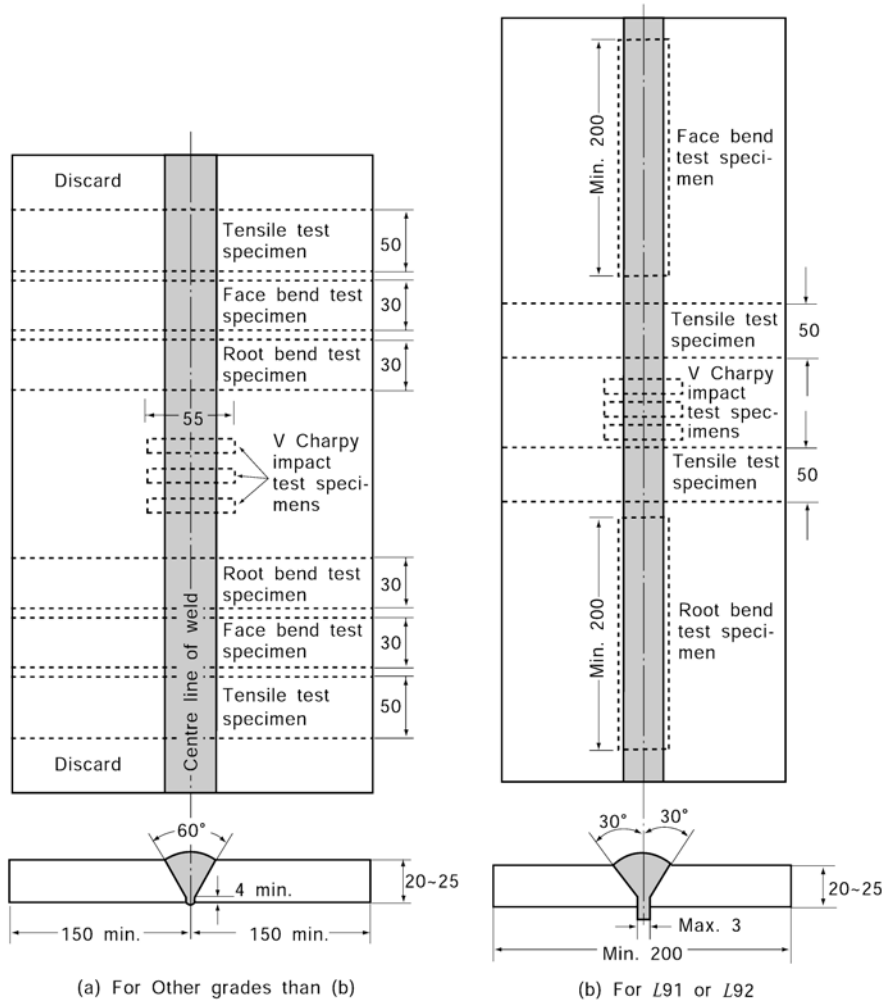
Butt Weld Test Assembly with Multi-run Technique (Automatic welding, Unit : mm)
